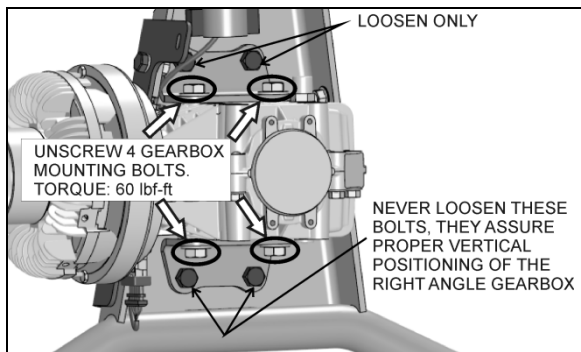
RIGHT ANGLE GEARBOX 05126
